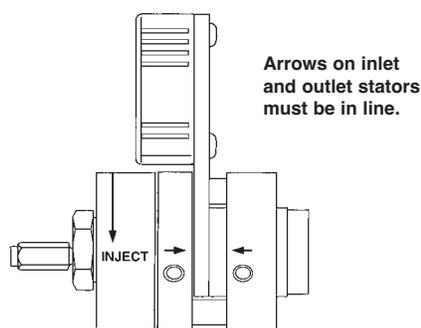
Correct alignment of Rotor-Handle Assembly and Inlet/Outlet Stators.
